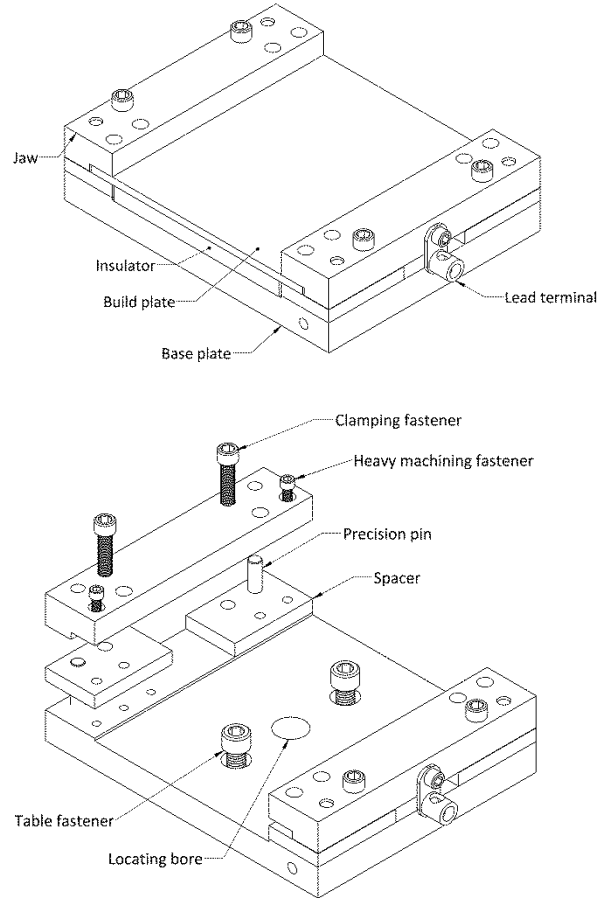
Assembled and exploded view. Build plate and insulator hidden on the exploded view.
